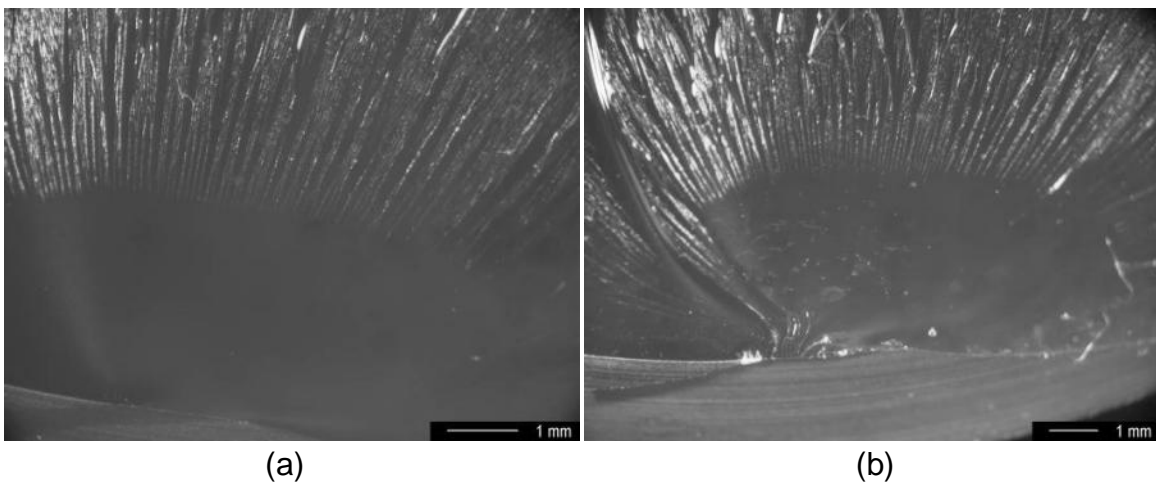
Images showing the fracture surfaces of (a) GB1-2 and (b) GB1-3.
